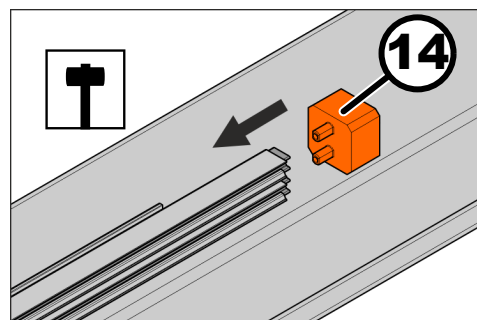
Tap the mounting cap with a hammer to connect the second end piece.
